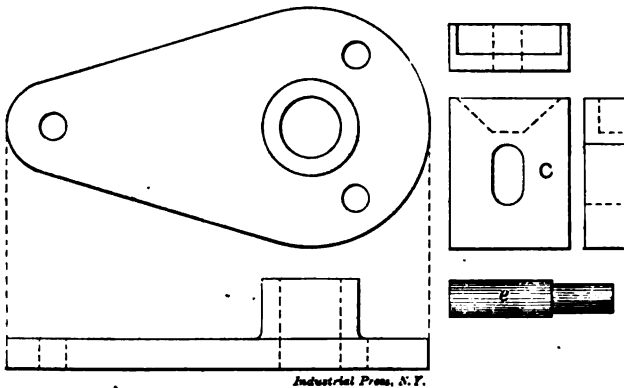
Piece to be Drilled in Jig, Fig. 49, and Detail of Clamp and Feet.
